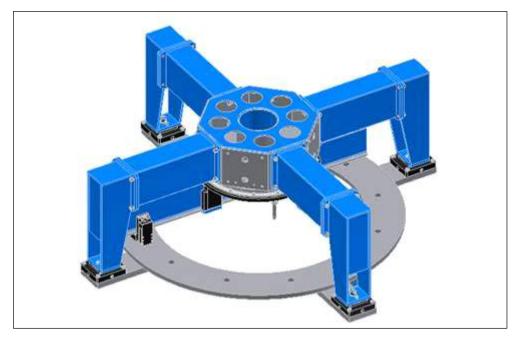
FIXTURE AND VERTICAL ASSEMBLY
